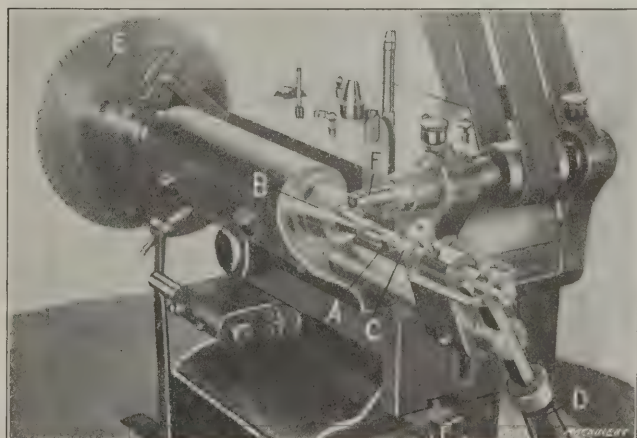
Machine for cutting the Teeth in the Brass Wheels
